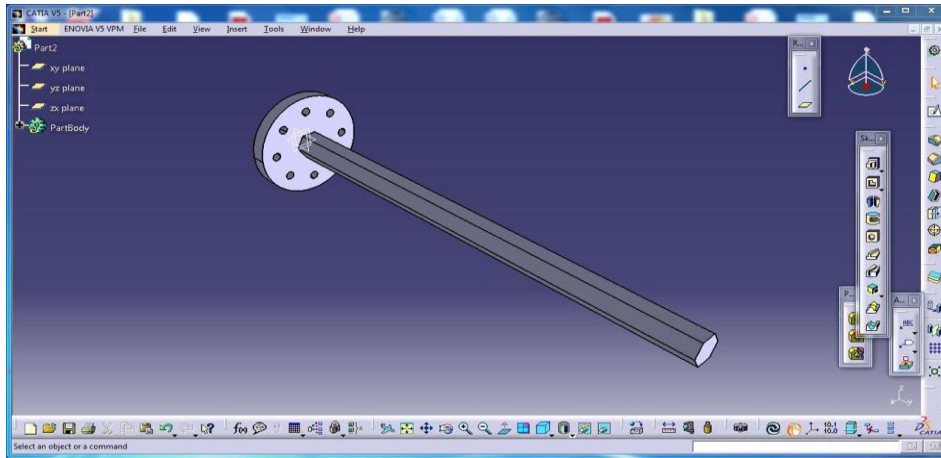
3D Design Of Rear Axle Shaft For Hexagonal Section
